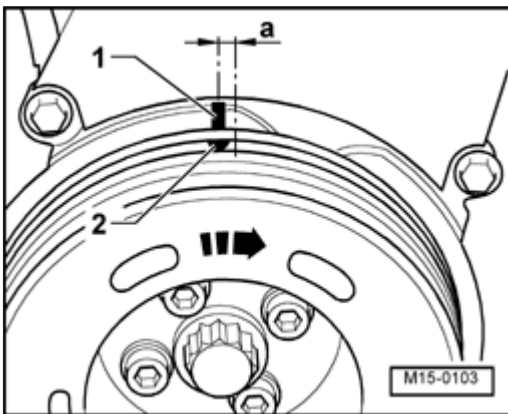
Aligning Notch On Belt Pulley/Vibration Damper With Notch On Toothed Belt Guard, Upper Part
